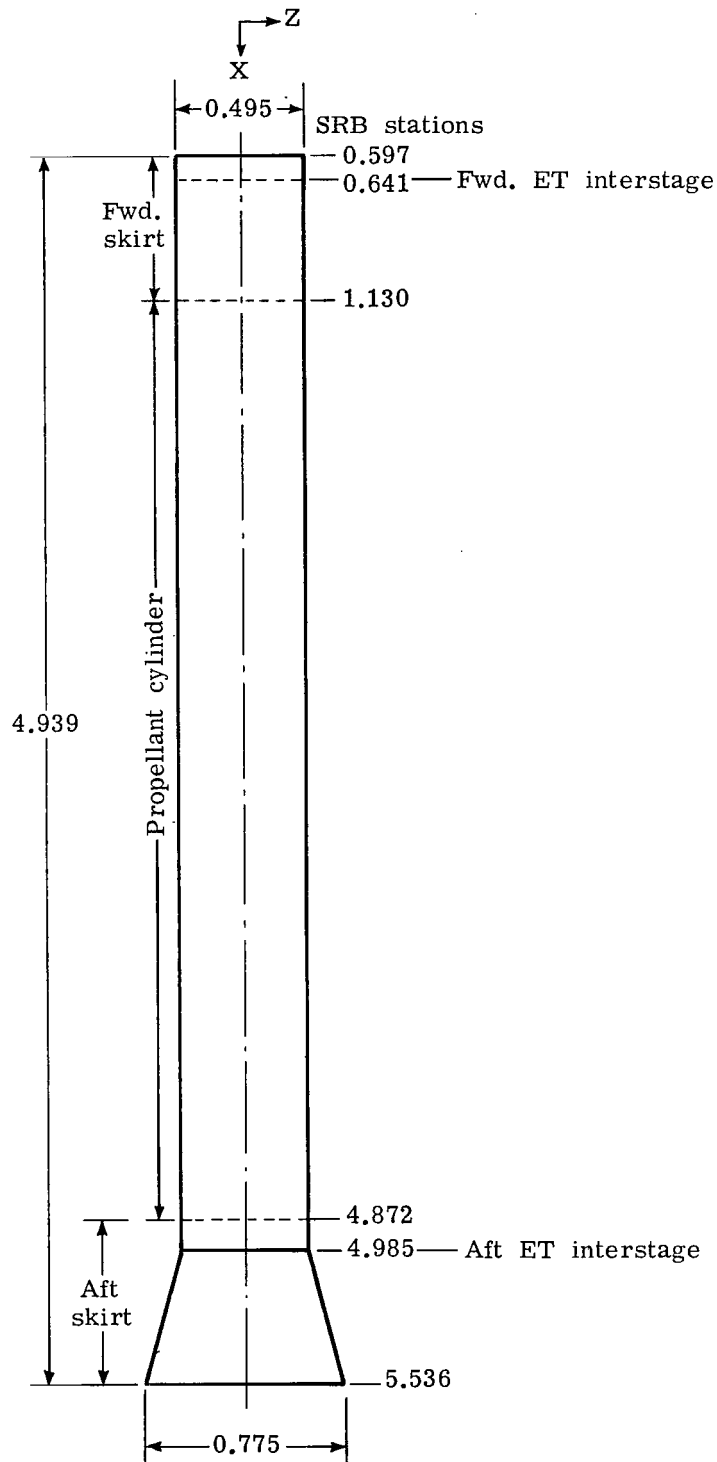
Schematic drawing of assembled 1/8-scale SRB element. All dimensions and stations are in meters.
